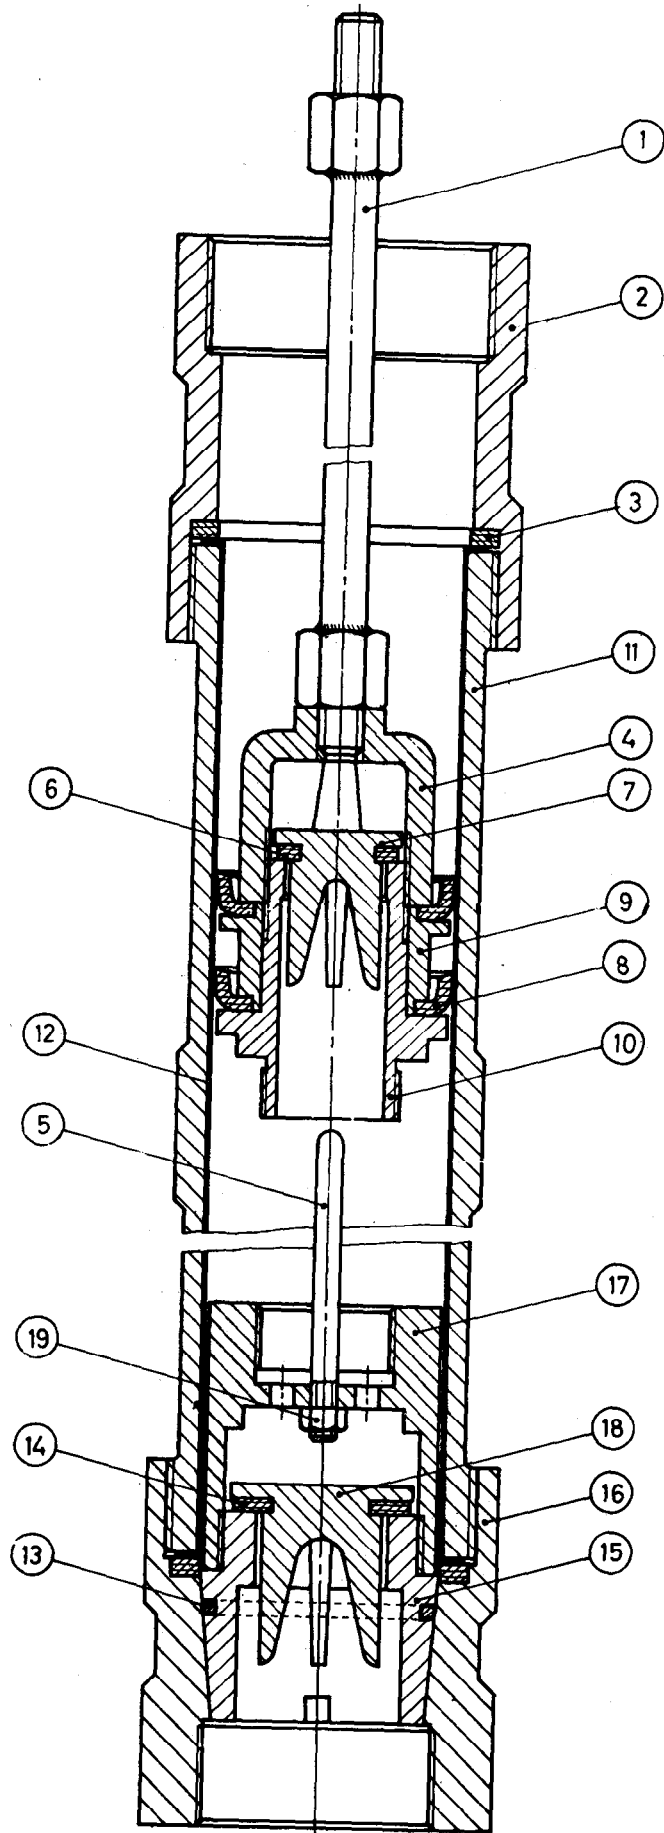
CYLINDER ASSEMBLY FOR DEEPWELL HANDPUMP (VLOM) (Contd)
